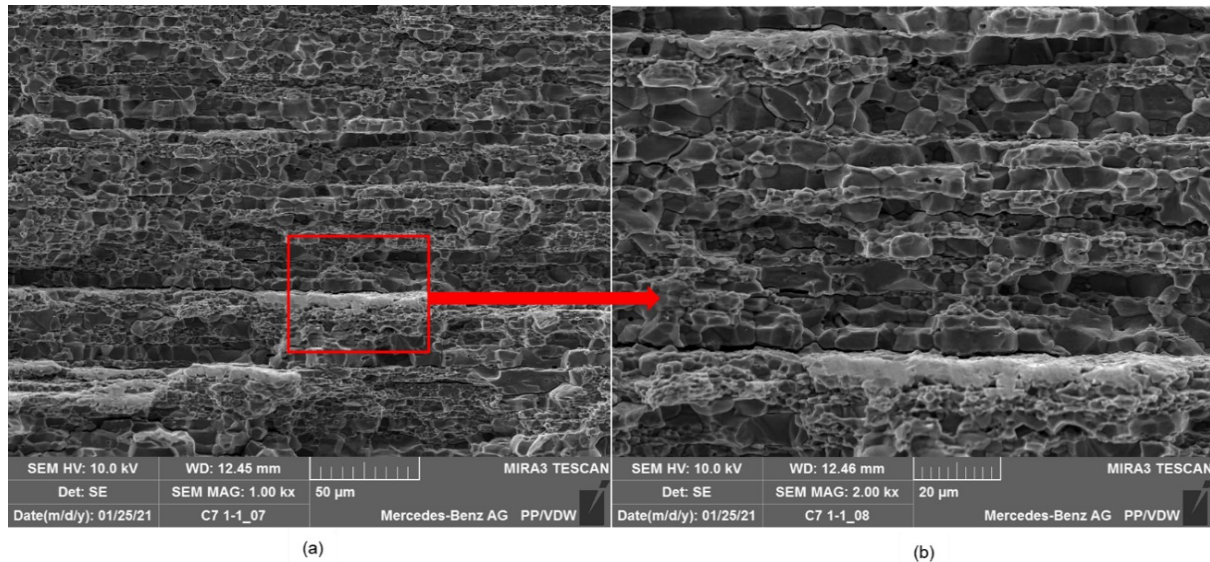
FRACTURE SURFACE OF KK17-T7 AFTER EXPOSURE TO MBSC TEST (WP1.1)
